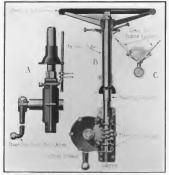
Components of Steering Grar: A, Lower End of Steering Column and Worm Wheel Rousing: B, Outlining Principle of Worm and Worm Wheel; C, Levers Controlling Carburetor and Jensites.
